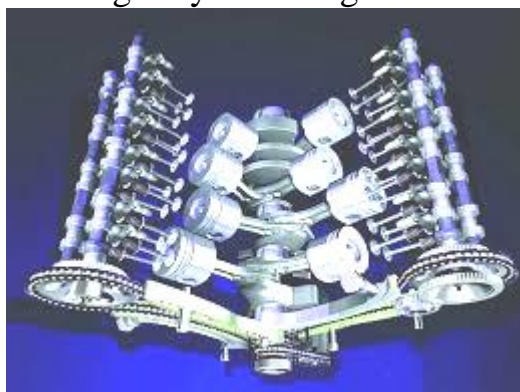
Diagram of a four-stroke eight-cylinder V -shaped engine with a crankshaft mechanism.
